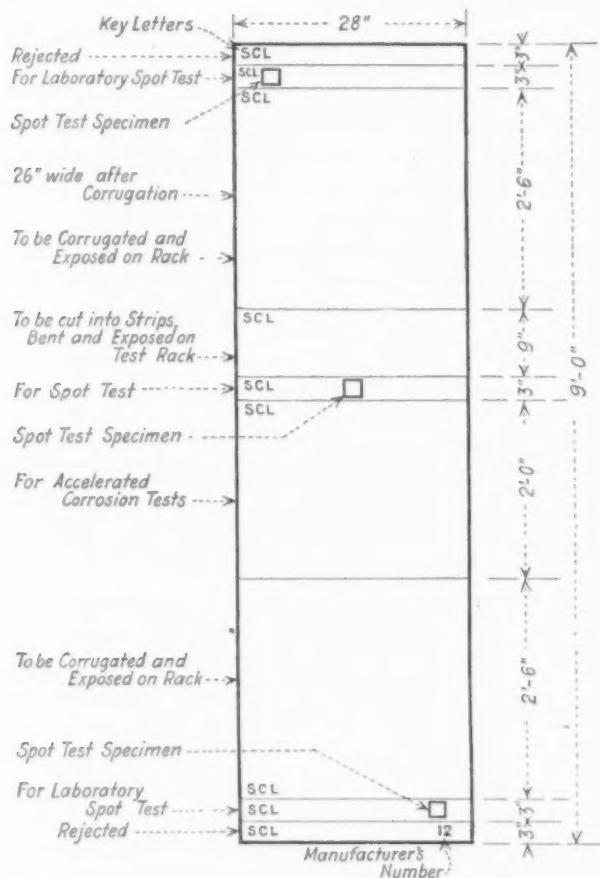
Sketch to Illustrate the Sampling and Marking of Sheets Before Corrugating.
